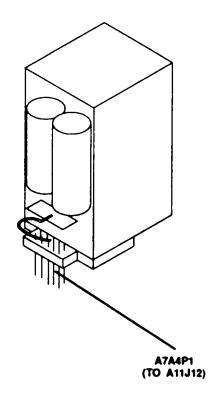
A7 Power Supply Assembly Component Location Diagram (10303-2200)
